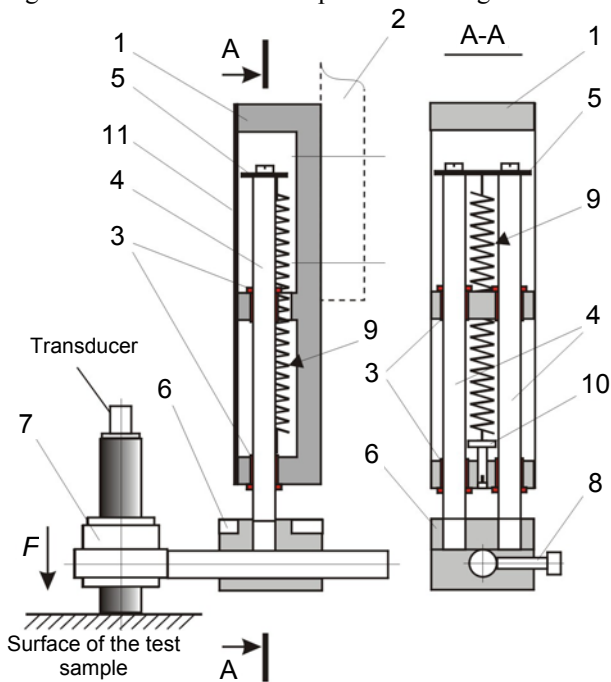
The holder of single transducer: 1 – adjuster; 2 – fastening element; 3 – drive bushing; 4 – slippers; 5 – transversal traverse; 6 – adjuster support; 7 – single holder; 8 – screw; 9 – spring; 10 – adjustment screw; 11 – cover
